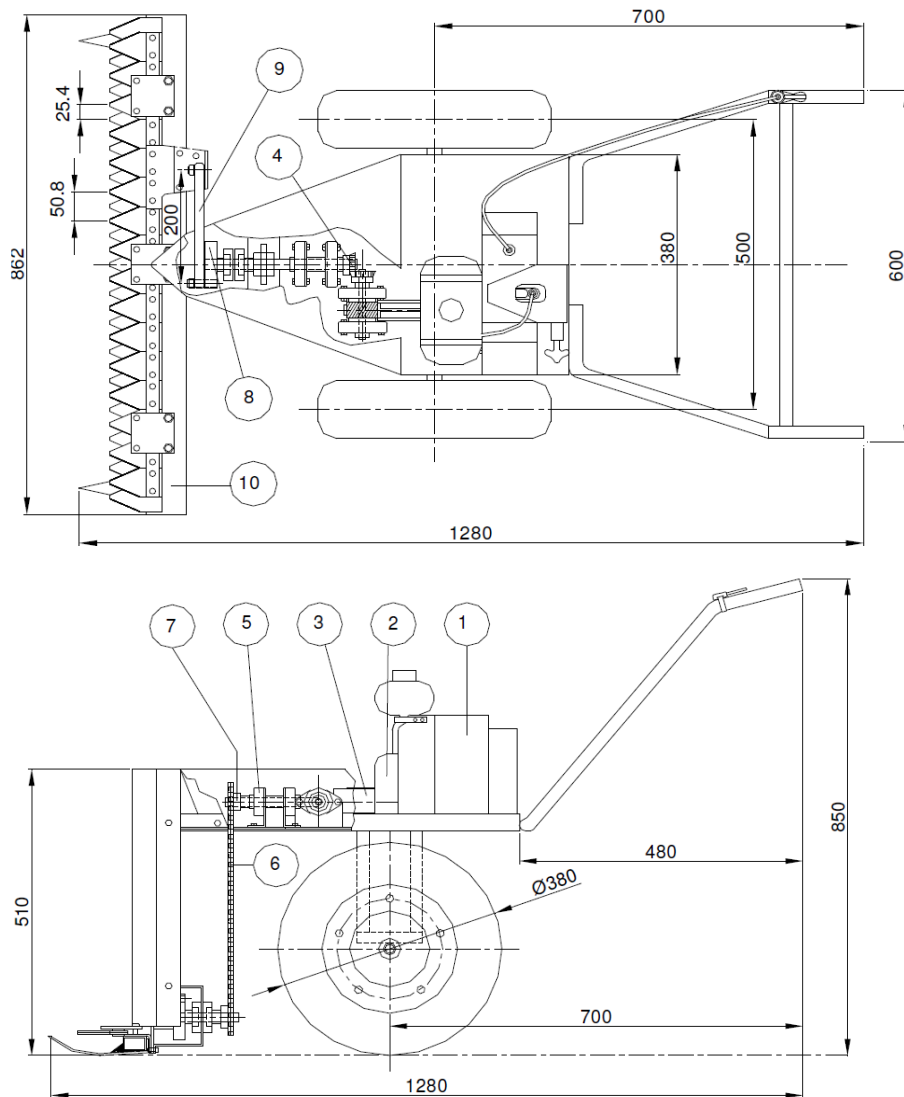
Push Type Cutter Bar Mower (Dimensions in millimeters) [17]
